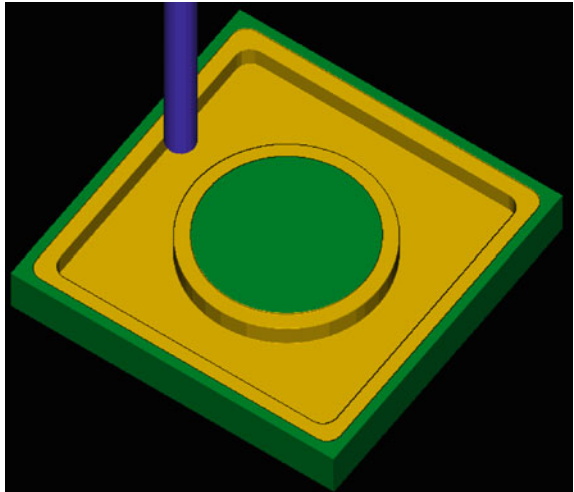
Toolpart strategy for the zigzag cutting method—pocket part
